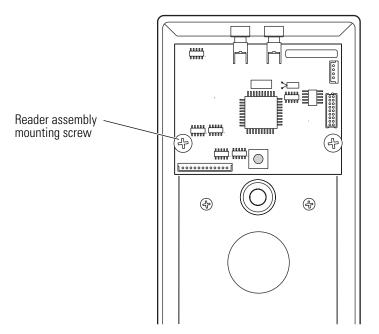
Removing and reinstalling the screws for the Keypad EZ reader assembly
